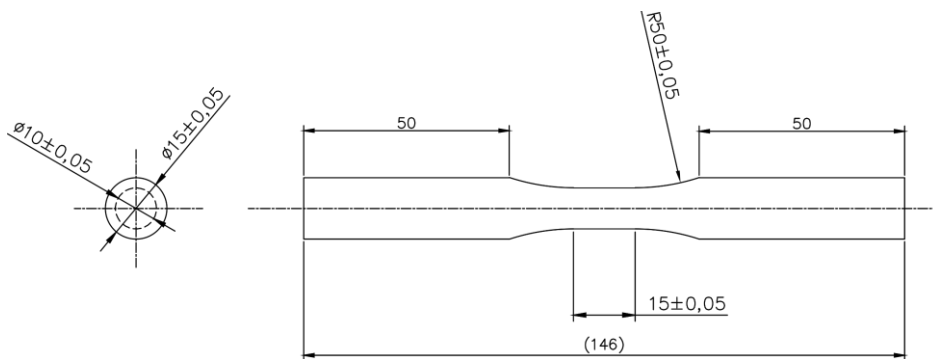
Fatigue specimens geometrical and manufacturing specifications
